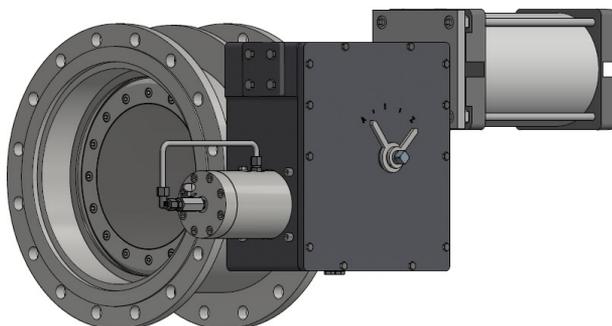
combined butterfly/check valve with a pneumatic actuator
